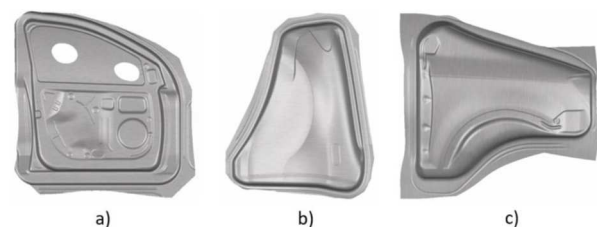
Selected industrial benchmark: a) steel inner door, b) aluminium fender and c) steel fender
